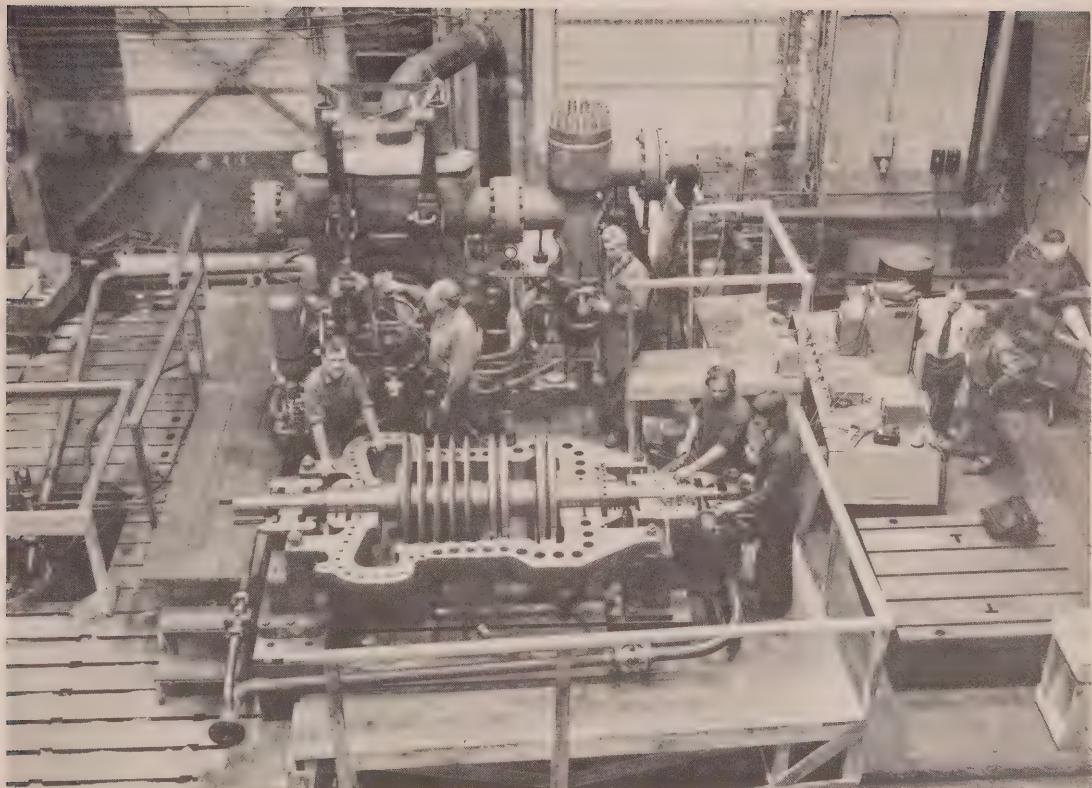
INDUSTRIAL TYPE BACKPRESSURE 15,000 KW STEAM TURBINE
